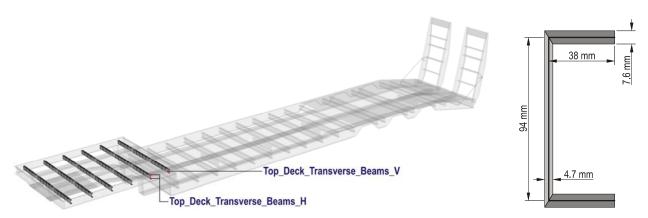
FE model of the top deck transverse beams and their cross-section
